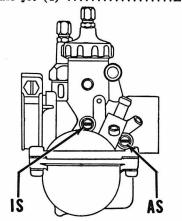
View of carburetor left side showing air bleed adjusting screw (AS) and idle speed adjusting screw (IS). All models are similar.
